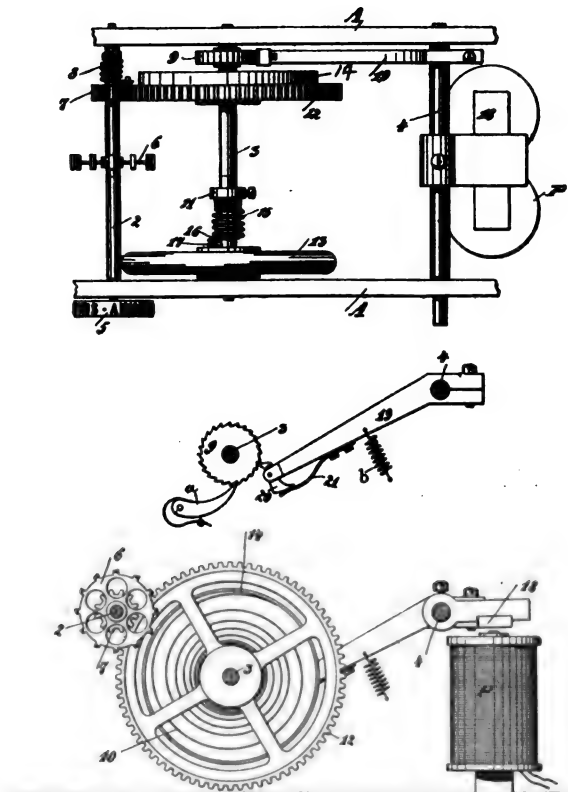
THE BURRY SELF-WINDING STOCK PRINTER.
